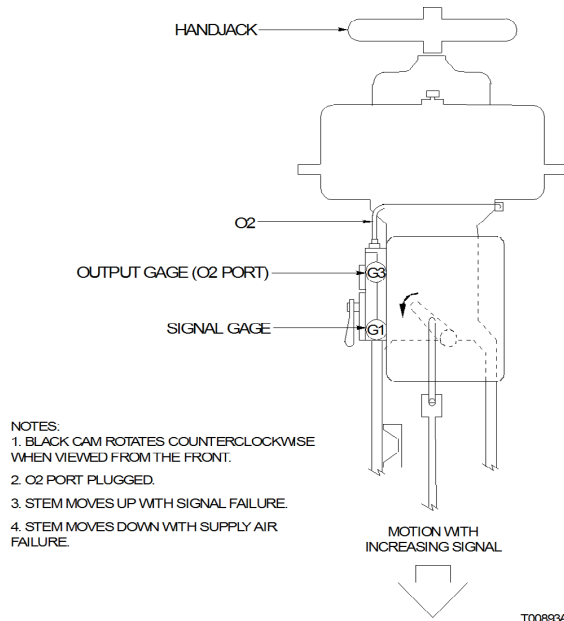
Direct Acting, Bottom Loaded, Single Acting Tubing Example
